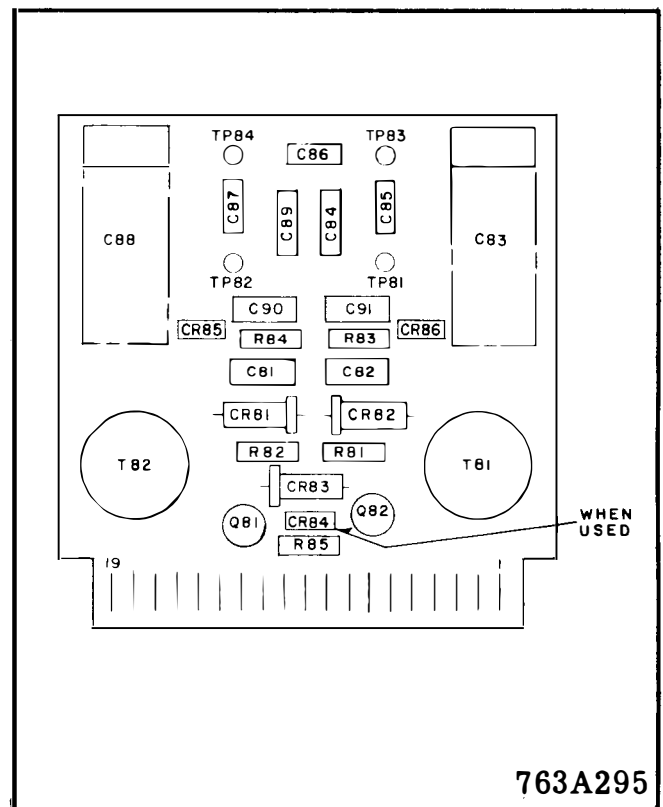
Component locations on the discriminator printed circuit board - germanium version.
